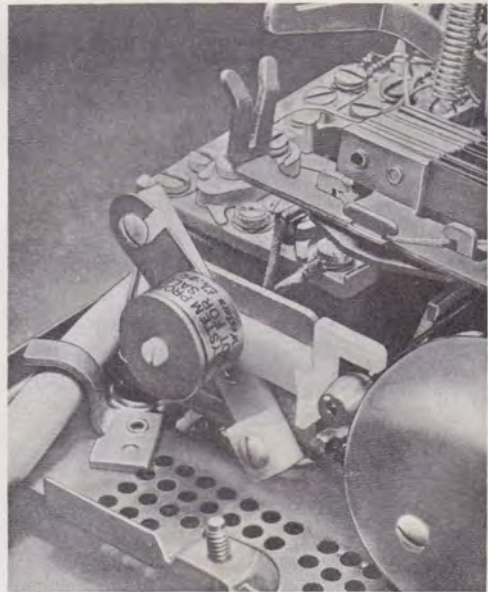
KS-20419L1 Buzzer Mounted on Bracket of H1A Ringer
